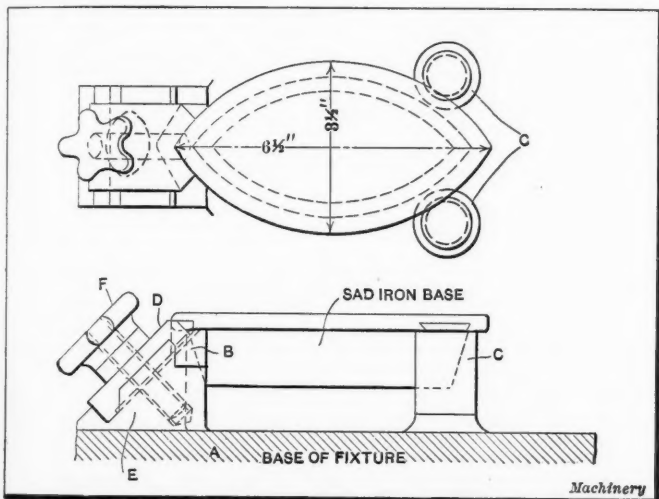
Method of Clamping the Sad Iron Bases on the Continuous Rotary Milling Fixture
